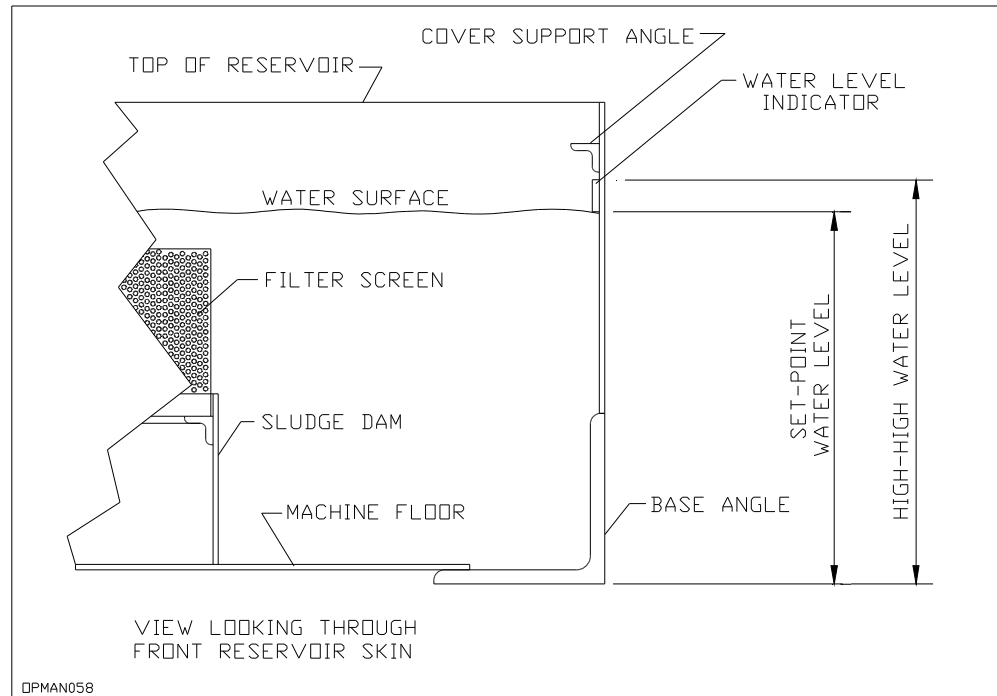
28: Water-Level Set-Point Dimensions and Measurement Location
